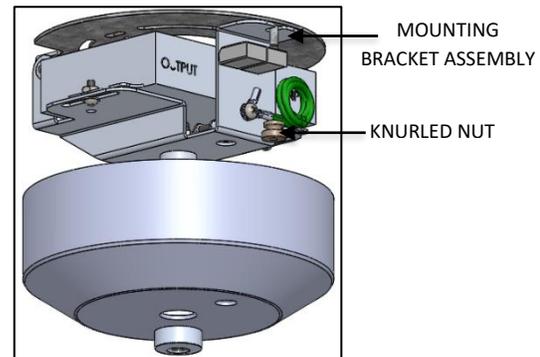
MOUNTING BRACKET ASSEMBLY
